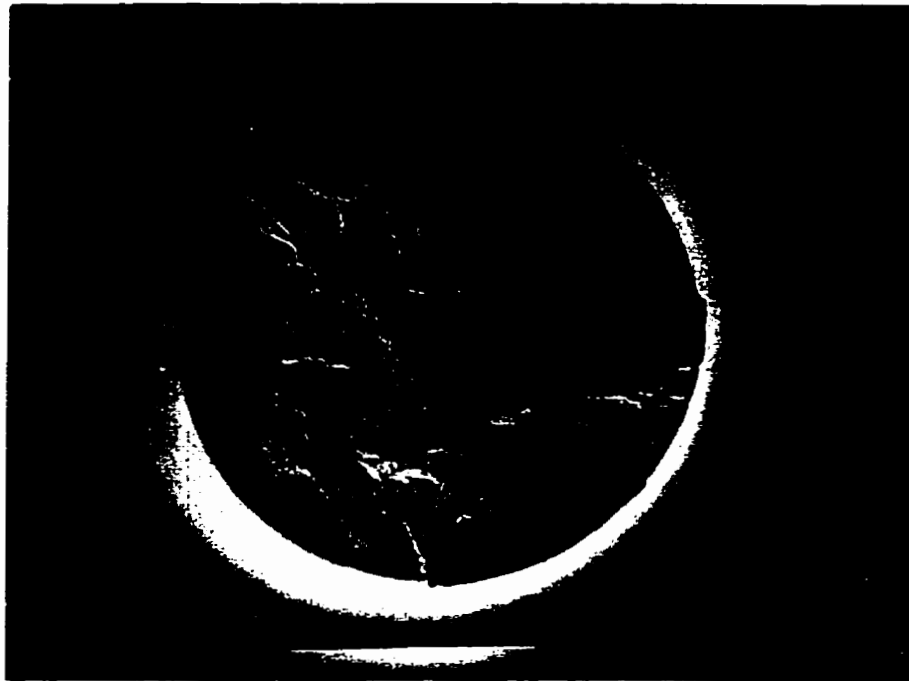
Fracture surface of sample MHCF4 (x20)
